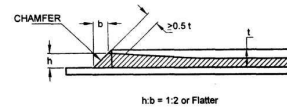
FULL SIZE FILLET WELD APPLIED TO THE EDGE OF A PLATE OR SECTION
